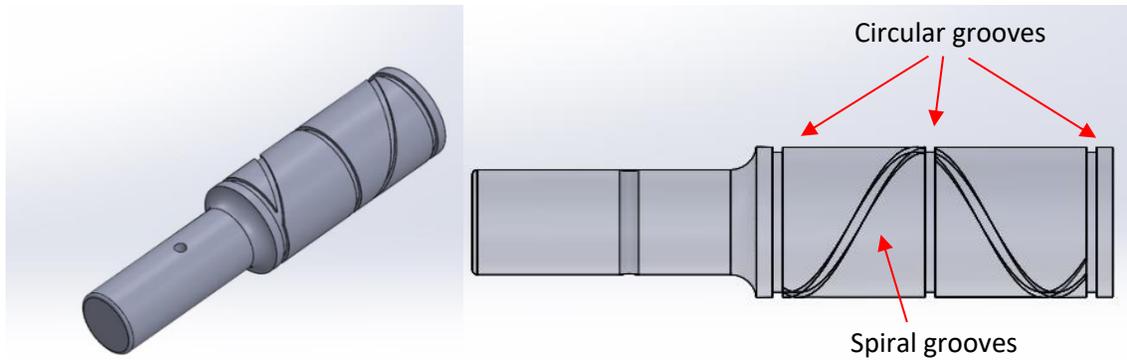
Details of the Shaft Design in A-Stand Idle End Design Iteration #2
